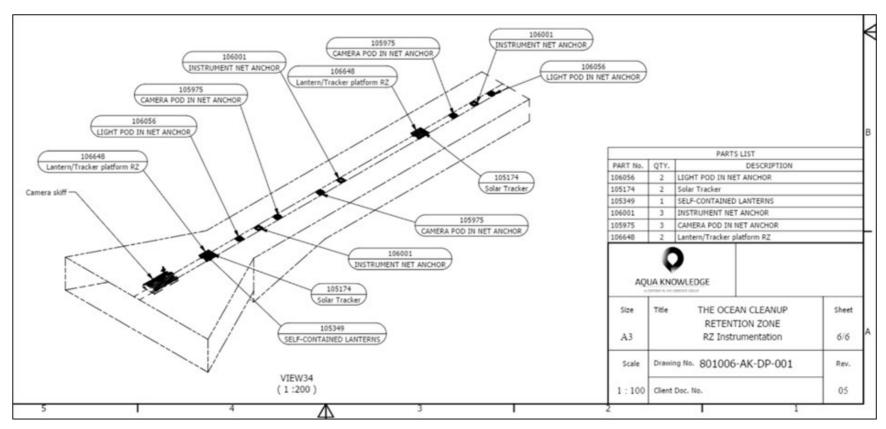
Schematic detailing the position of S002 retention zone instrumentation.
